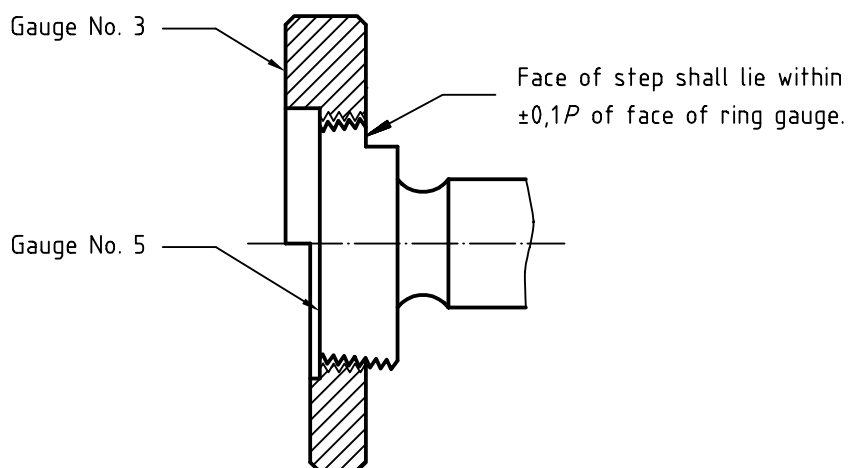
Checking of pitch diameter of new parallel full form threaded ring gauges using taper modified thread form check plug gauges
